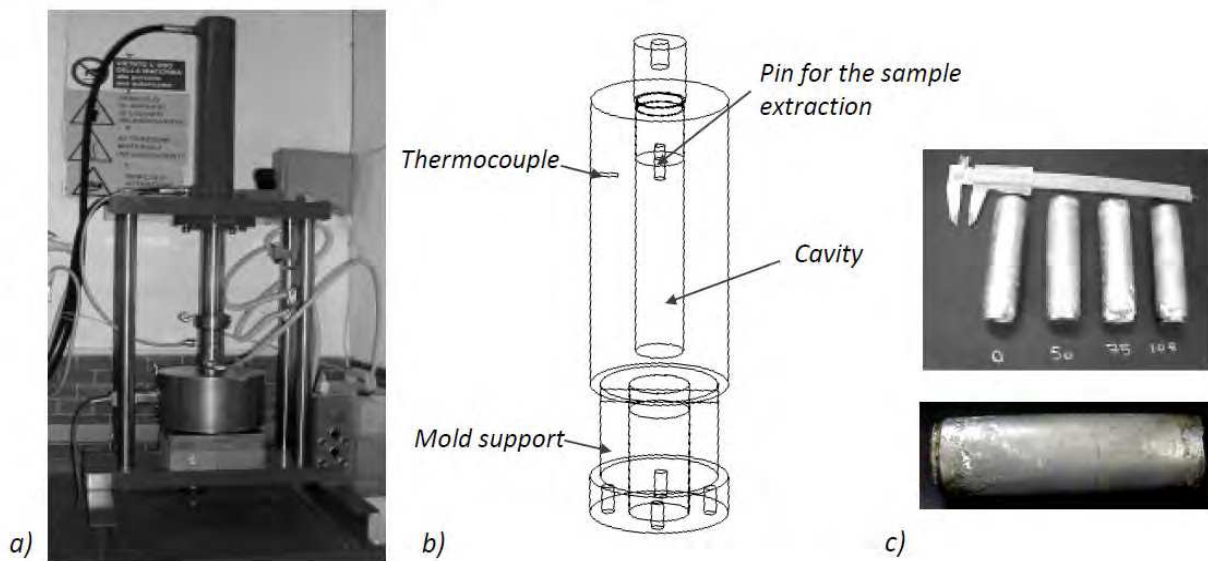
(a) The experimental apparatus; (b) a sketch of the mould for the direct squeeze casting; (c) cast ingots.
